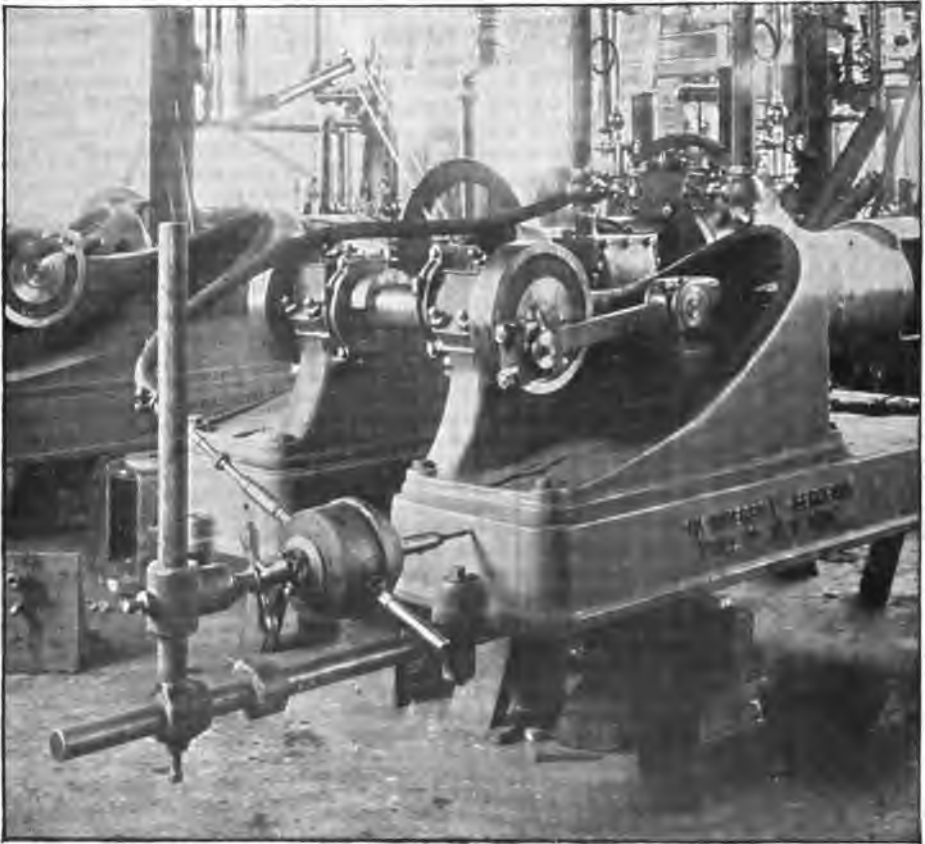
FIG. II—A METHOD OF MOUNTING A PNEUMATIC DRILL, ILLUSTRATING ITS PORTABLE CHARACTER.
